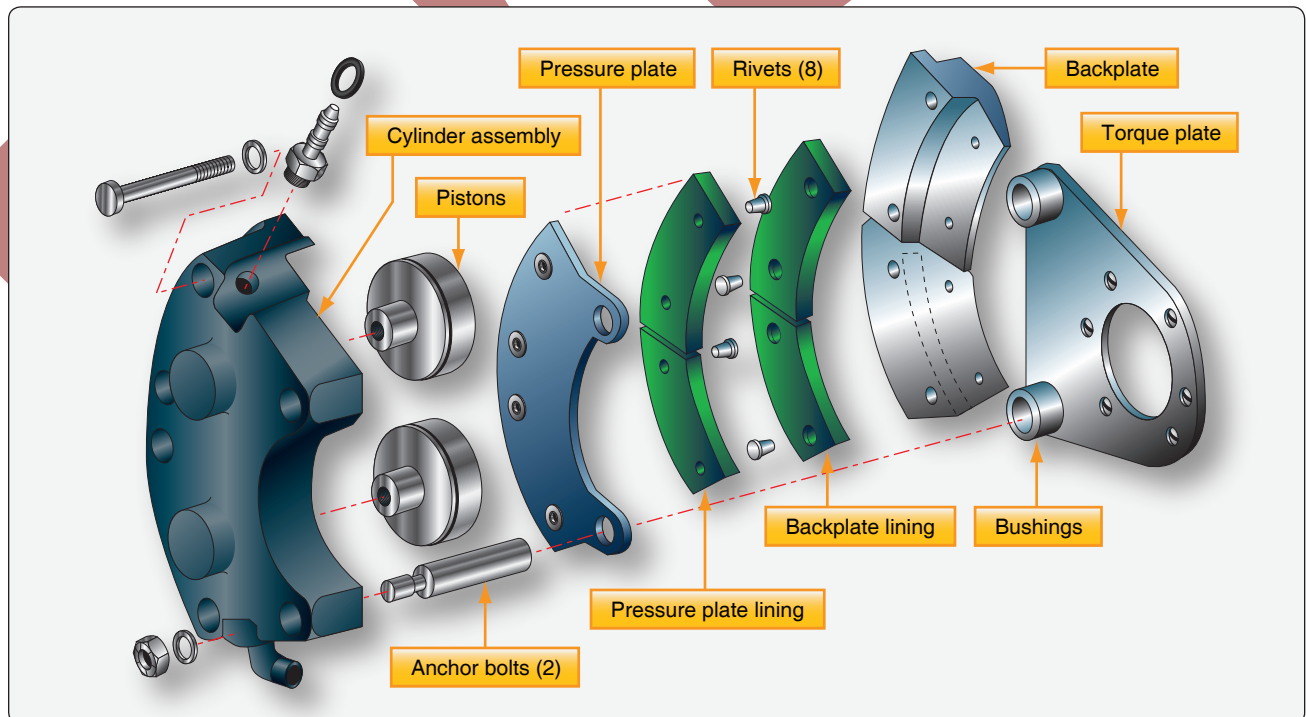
An exploded view of a dual-piston Cleveland brake assembly.
